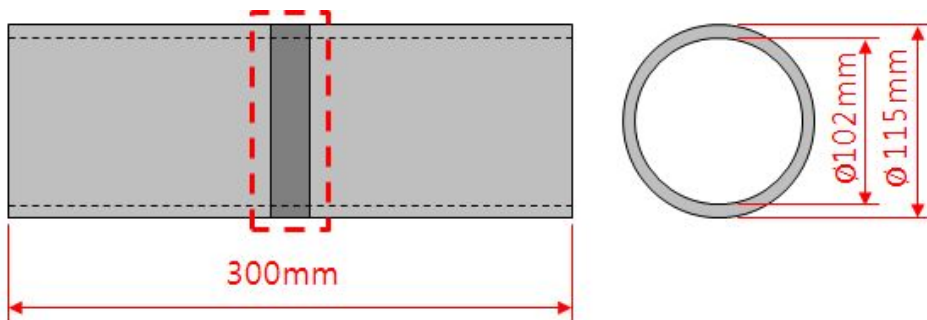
Design drawings of pipe welded specimen
